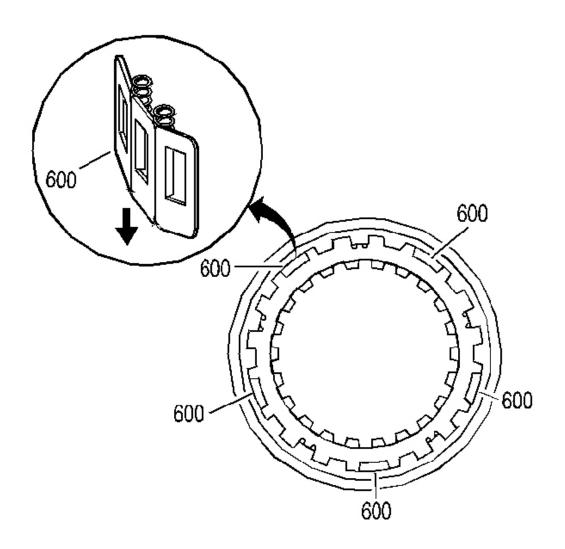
Identifying 3-4 Clutch Boost Spring Assemblies Courtesy of GENERAL MOTORS CORP.
